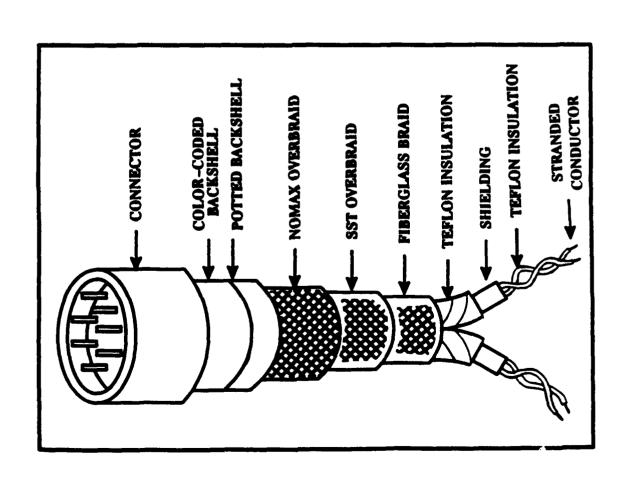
System Shielding and Grounding Plan Provides RFI, EMI and Lightning Protection
